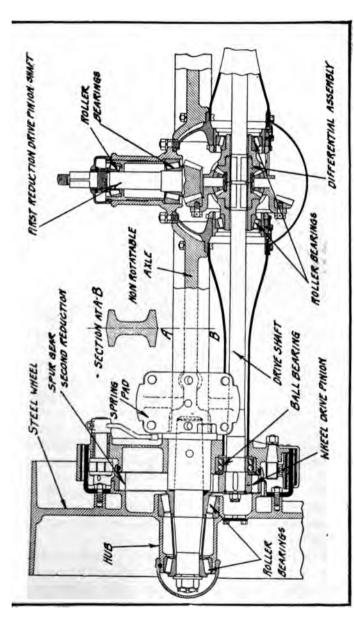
Part Sectional View Showing Construction of Internal Gear Drive Bear Axle.
